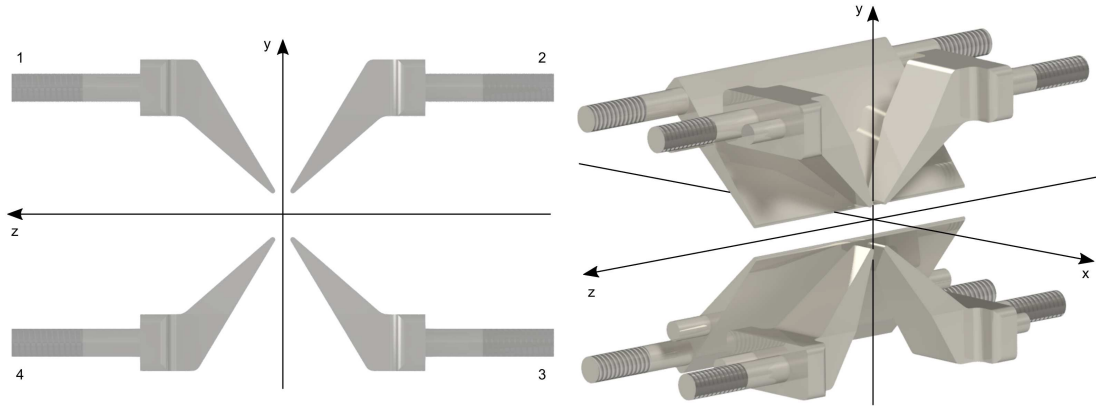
CAD assembly of the endcap electrodes and general view of the endcaps with the blade electrodes (two blades have been removed for a better insight).
